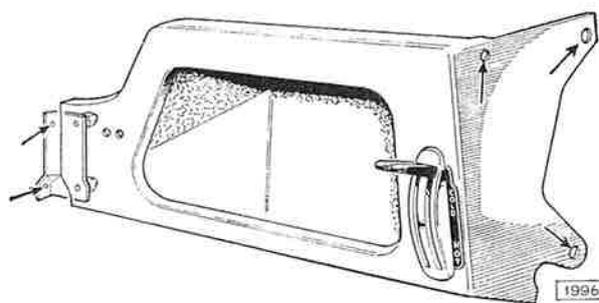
Location of the glovebox attachment points (Right hand drive).
